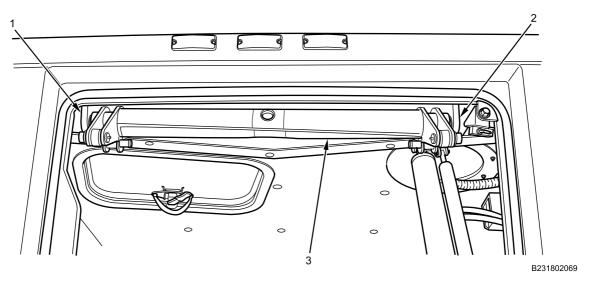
Rear Door Lock Assembly Mounting Brackets Removal.
